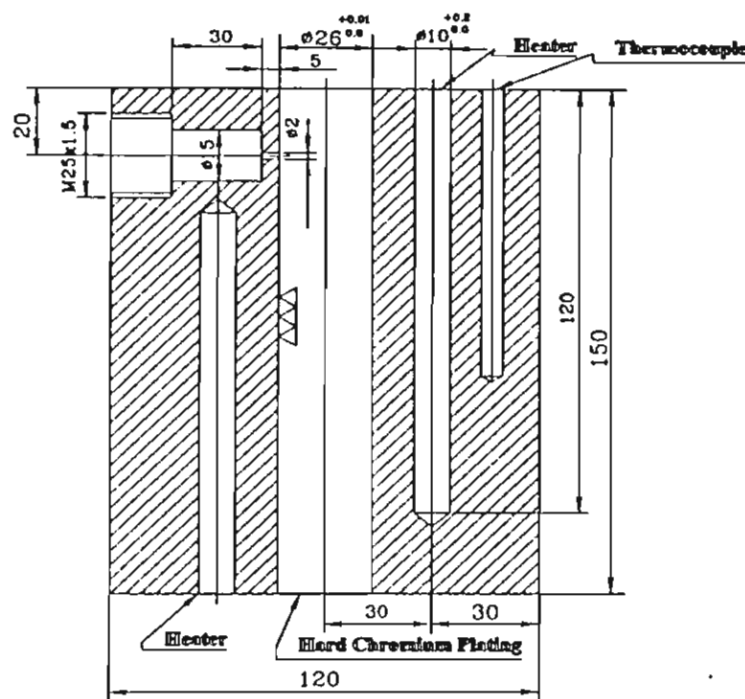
Plan and section view of the barrel system (dimensions in mm)
